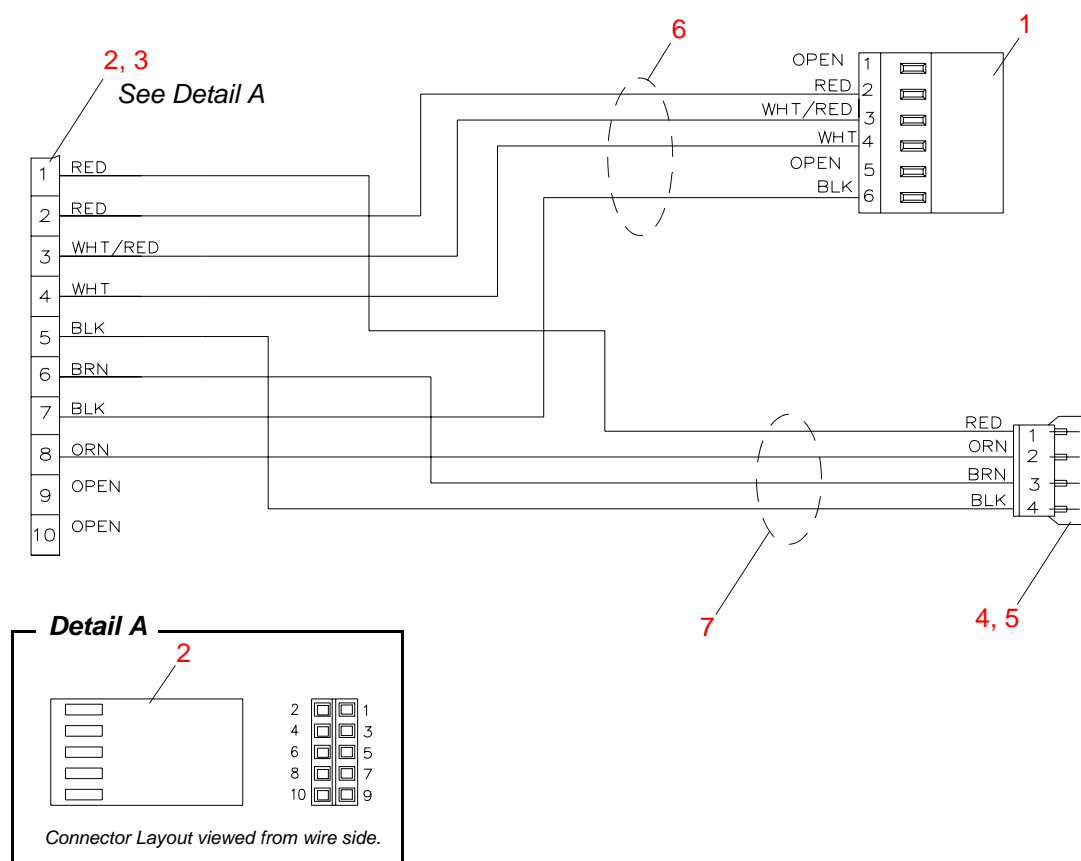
Shielded Display/DMX Communication Cable Assembly (VL500A)
